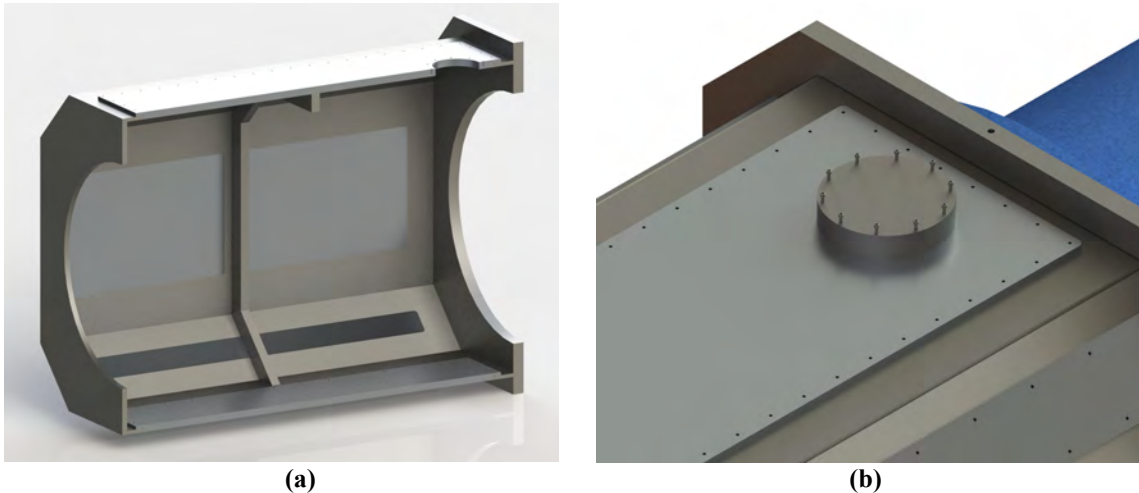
(a) cross-section of the test section with a rib welded to the inside of the skeleton to increase support. (b) Pressure relief plate set for approximately 1psi differential to assist with avoiding over-pressurization of the back assembly.
